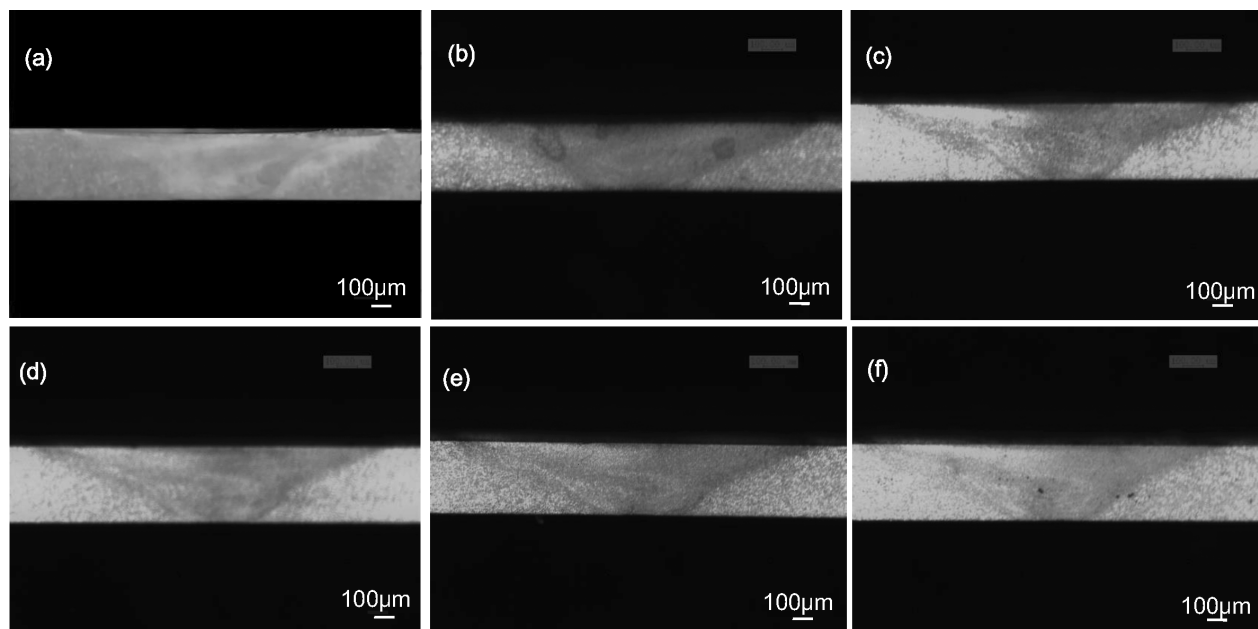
Macro-section of specimen section at each position: a) 600–300 welding starts; b) 600–300 welding is in progress; c) 600–300 lifting rotation speed to 800–300; d) 800–300 welding starts; e) 800–300 welding is in progress; f) 800–300 welding ends
